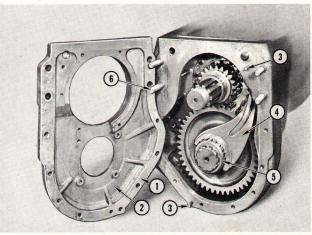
SUPPORT PLATE, REMOVED 1. Gasket 4. Overdrive Shift Yoke 2.
